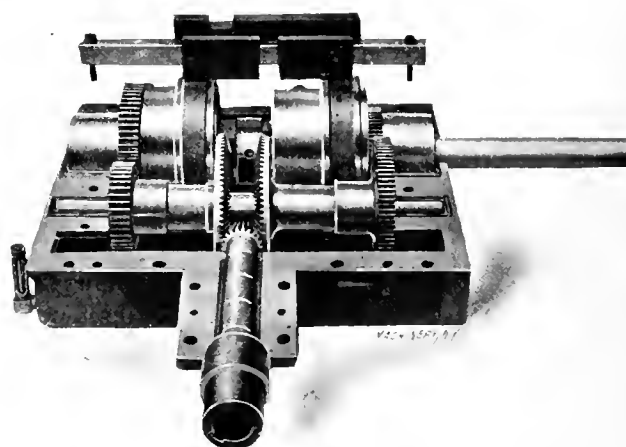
Construction of Reversing Device—Upper Half of Cover removed.
